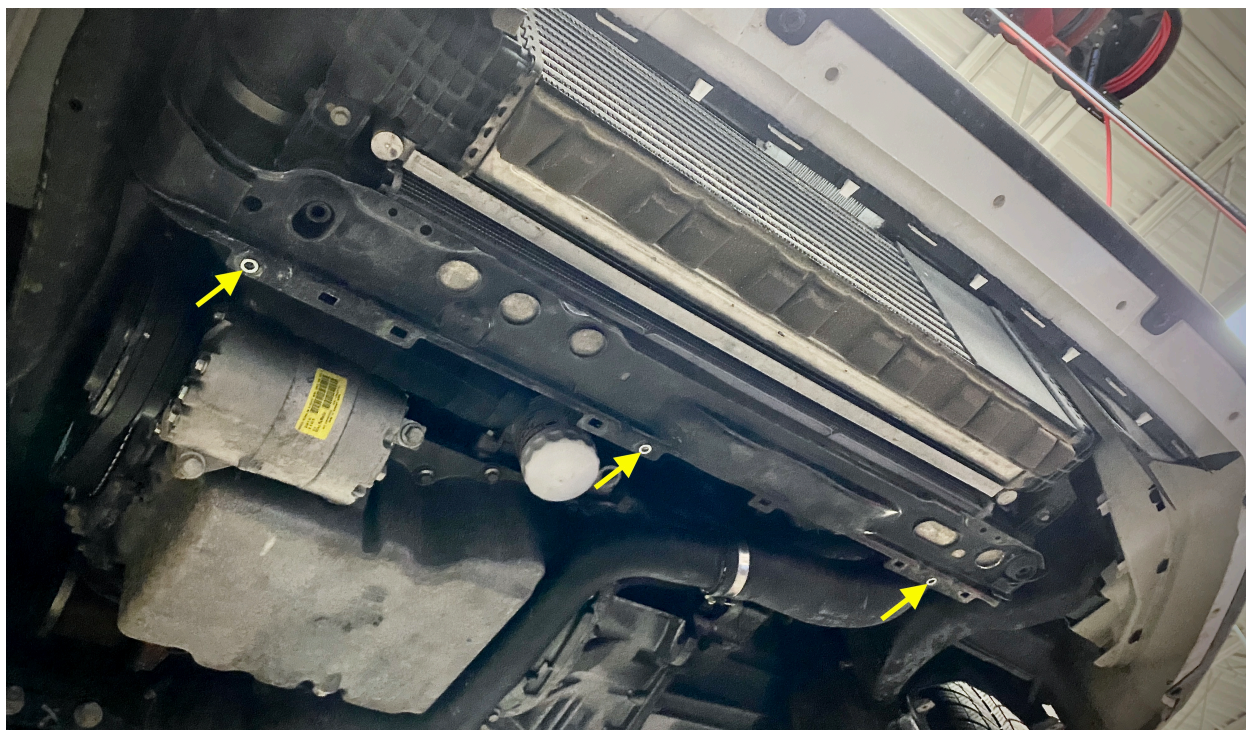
RADIATOR SUPPORT WITH RIVET NUTS INSTALLED
